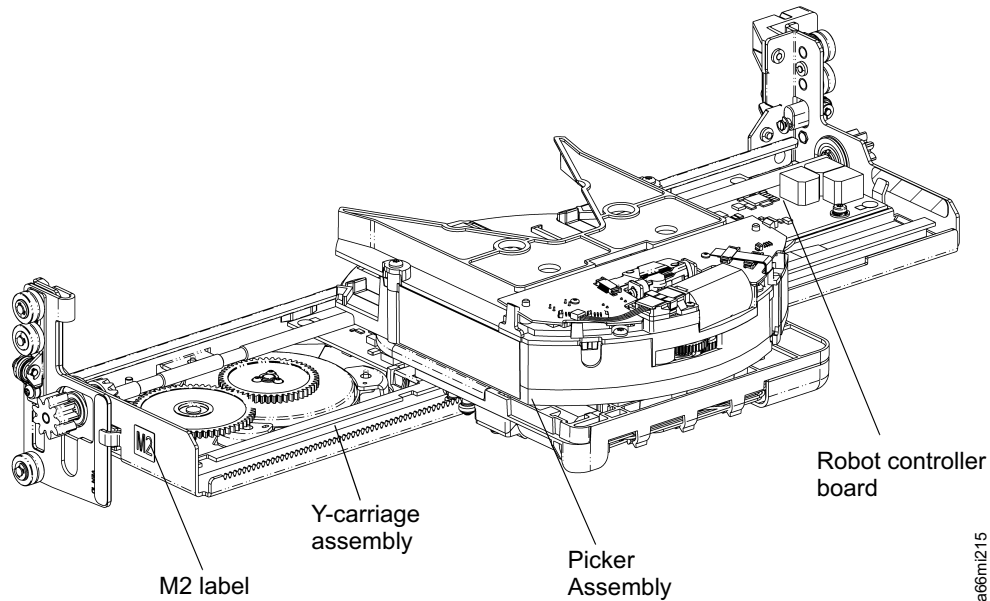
Model 2 robot assembly (picker assembly and Y-carriage assembly)
